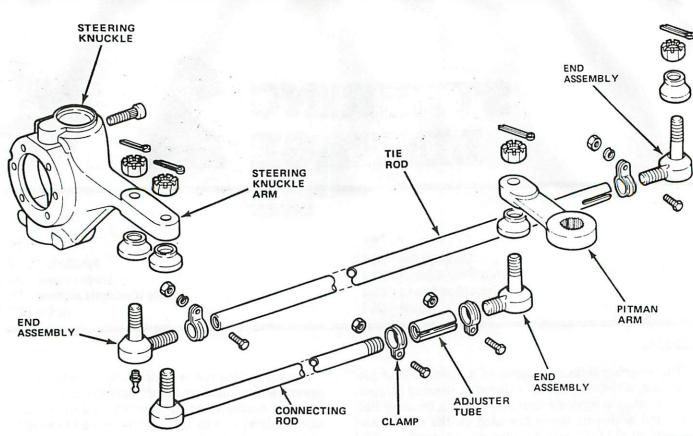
M-2 Steering Linkage-CJ and Scrambler Models
